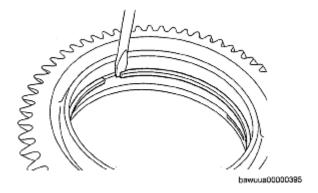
Removing Snap Ring From Counter Drive Gear Courtesy of MAZDA MOTORS CORP.
